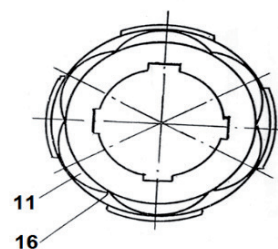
A type of the bar rigged set's end without a removable drill bit
